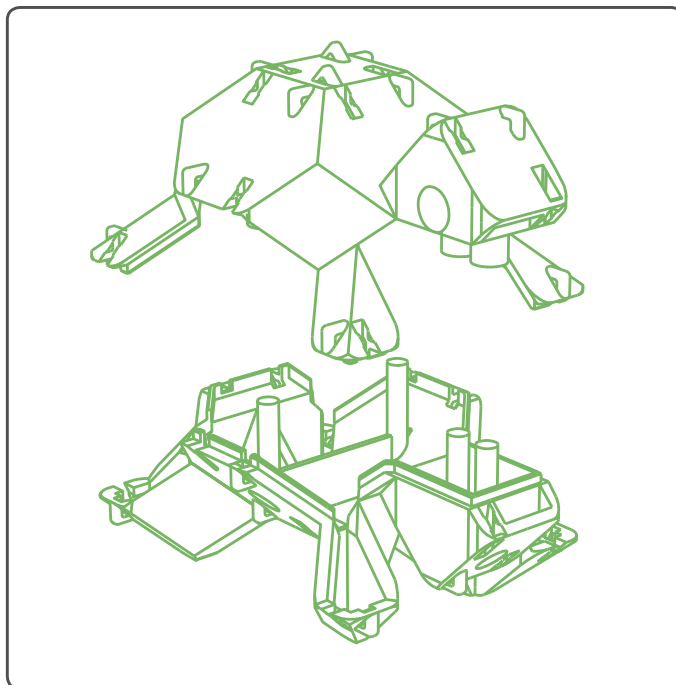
The completed block, because it was hollow, would be made of two parts that would snap together, but each of the two parts would have to be made in straight-pull molds.
